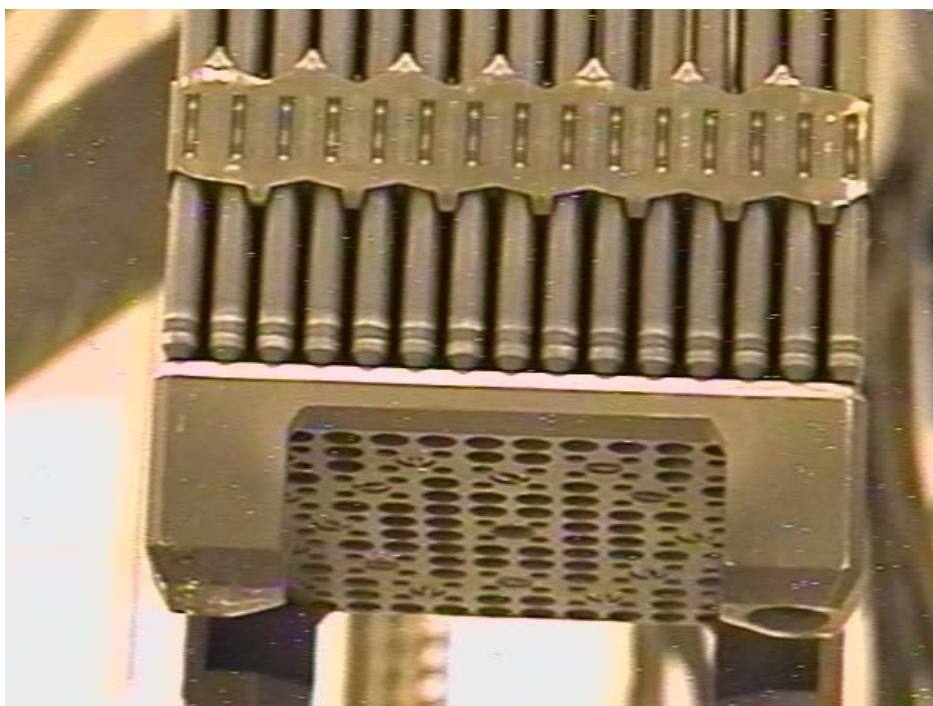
Fuel assembly V-05—bottom left nozzle—noted mechanical fasteners searing guide tubes.
